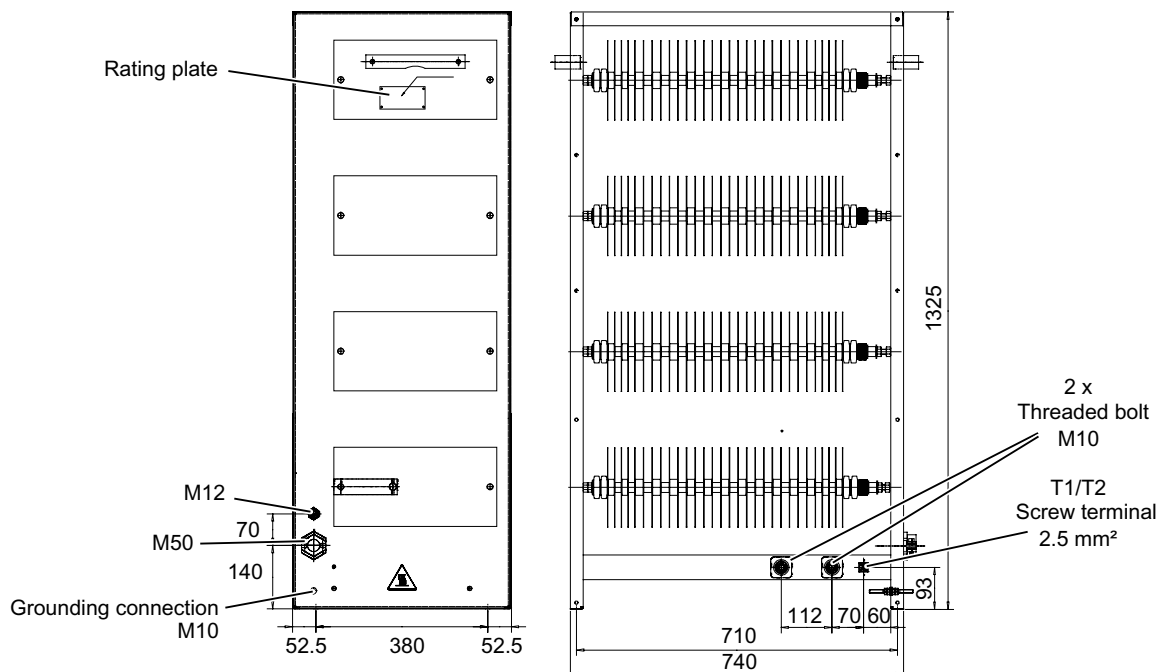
Dimension drawing for braking resistor 50 kW, 250 kW (option L62 / L65)
